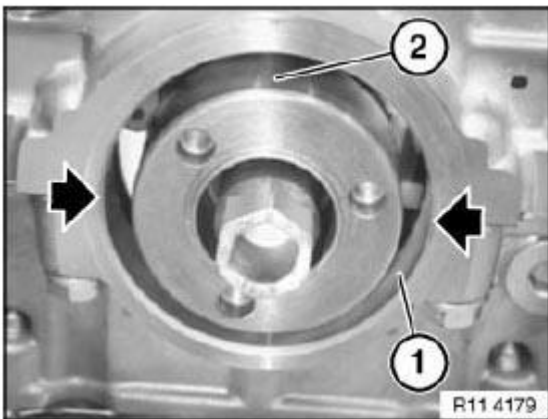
Identifying Sealing Surface And Running Surface For Crankshaft Radial Seal
